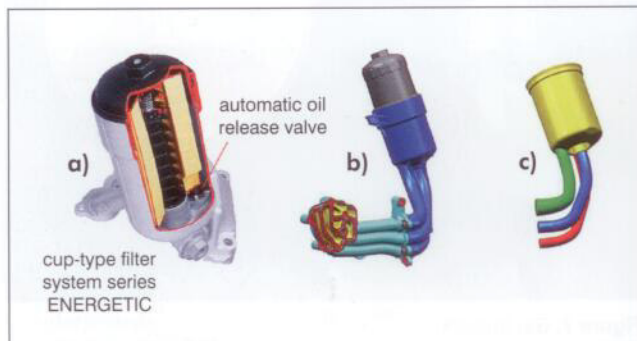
Potential further development of pressure die cast oil filter housings – streamlined 3-dimensional channels can be produced by gas injection: a) conventional oil filter housing, b) potential future oil filter housing, c) illustration of the cavities in b)
